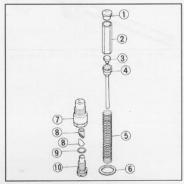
① Rubber tensioner ⑥ Sealing washer (14 mm)
